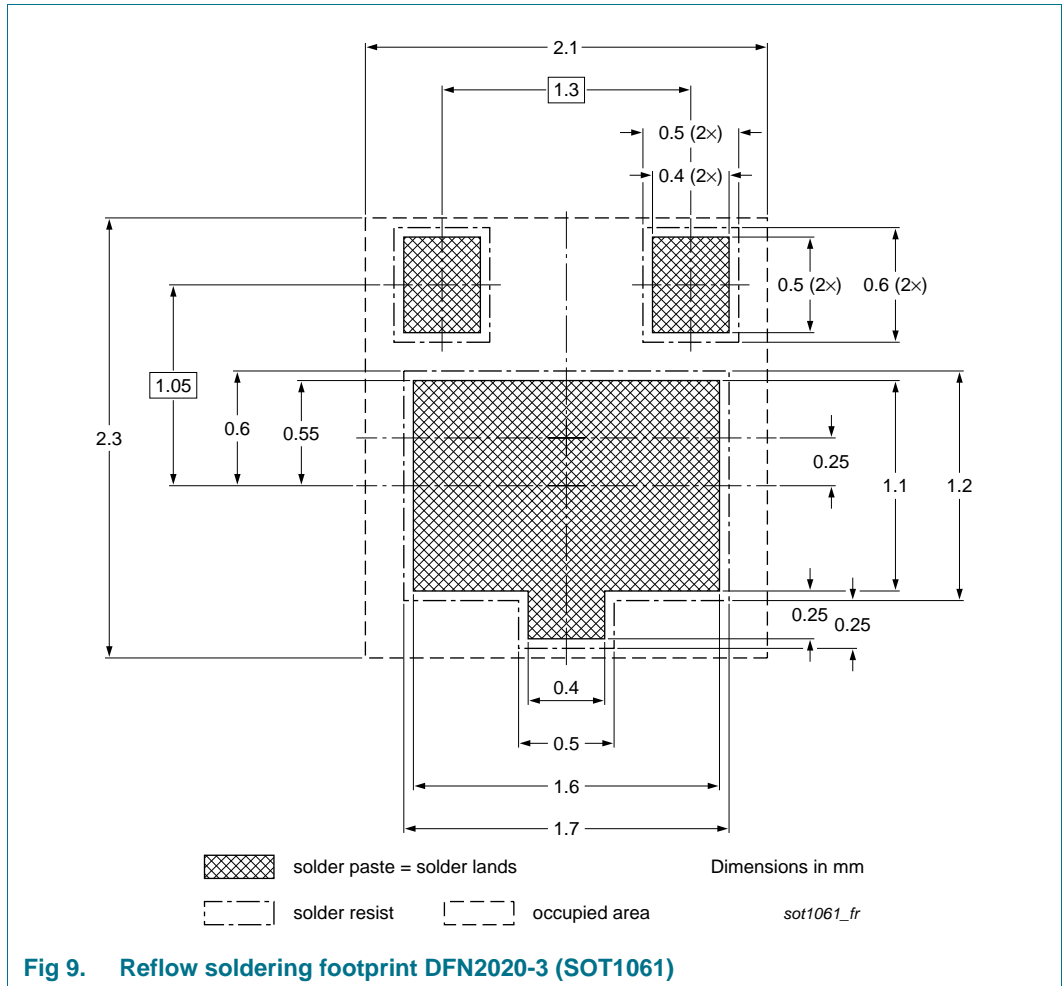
Reflow soldering footprint DFN2020-3 (SOT1061)
